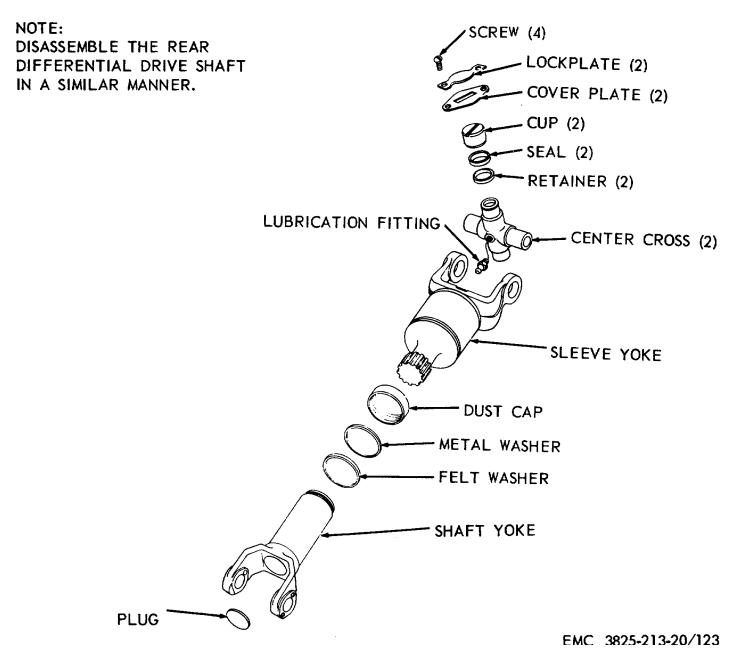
Carrier front differential drive shaft assembly, disassembly and reassembly, exploded view.
